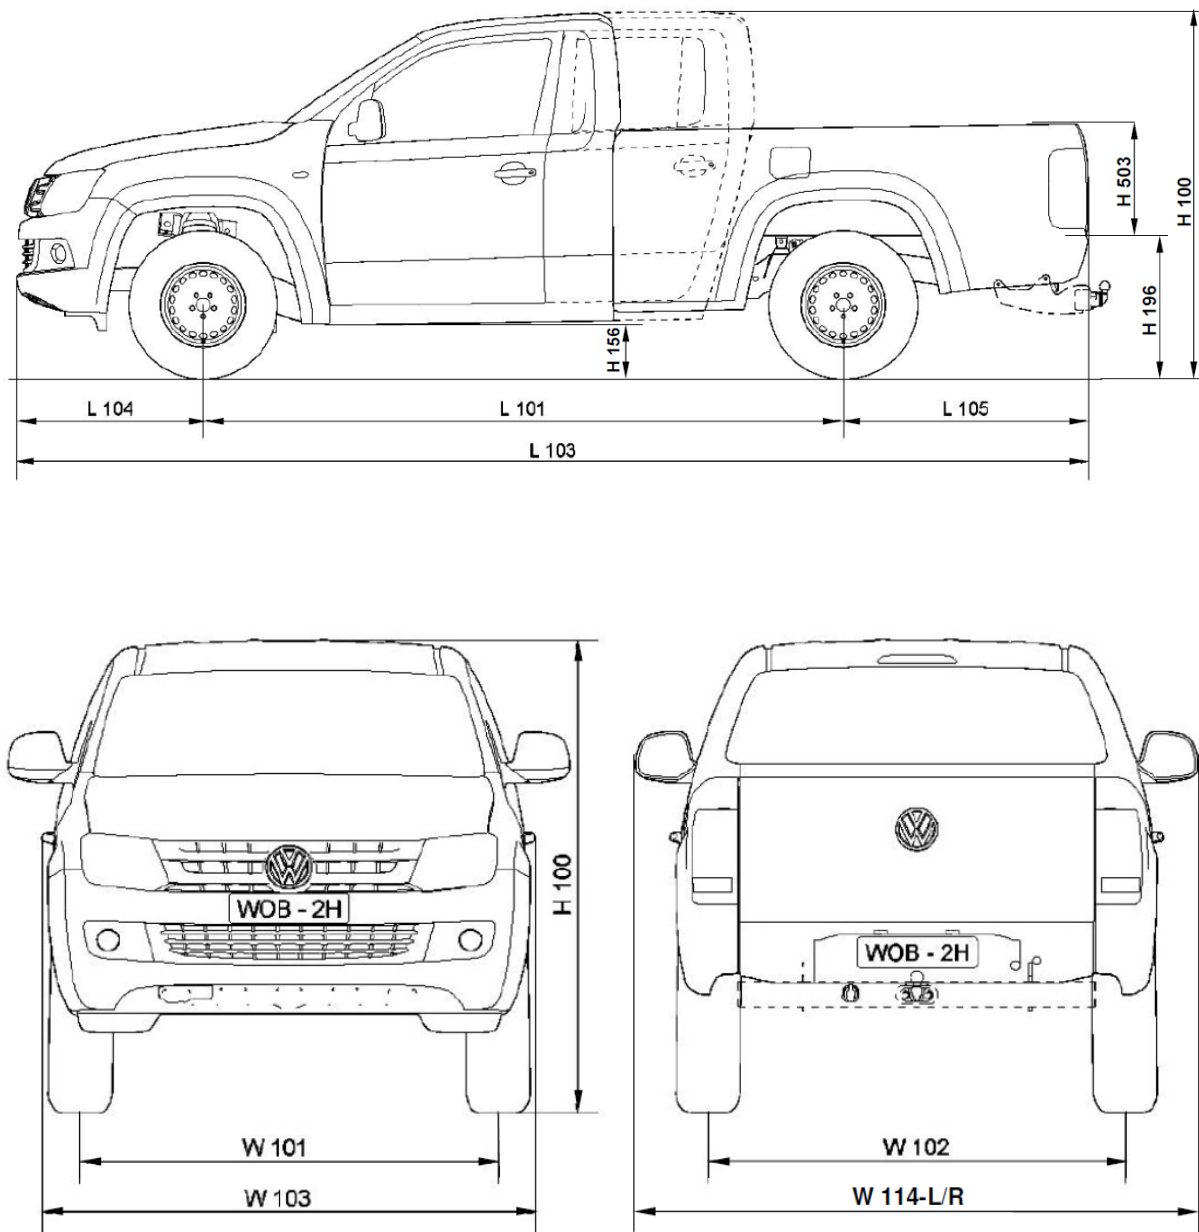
Vehicle dimensions of AMAROK (views: side, front and rear)
